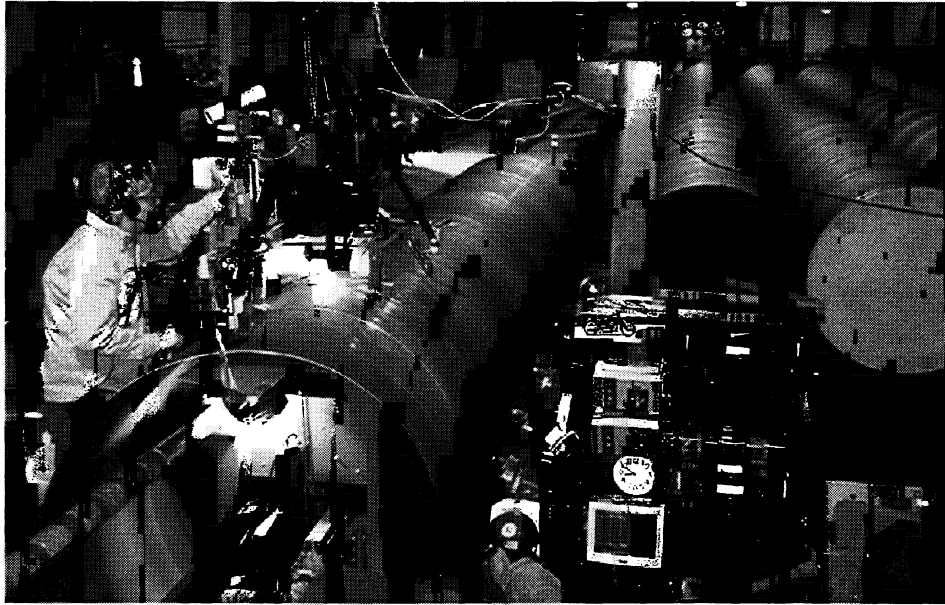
Welding 1/8" thick stainless steel on the spiral tube mill.
